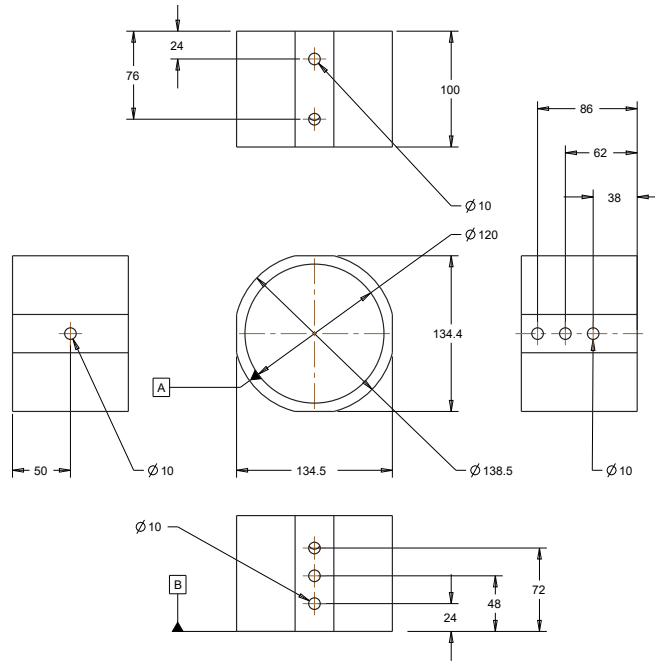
Technical drawing of calibration block used for alignment of camera and laser profiler
